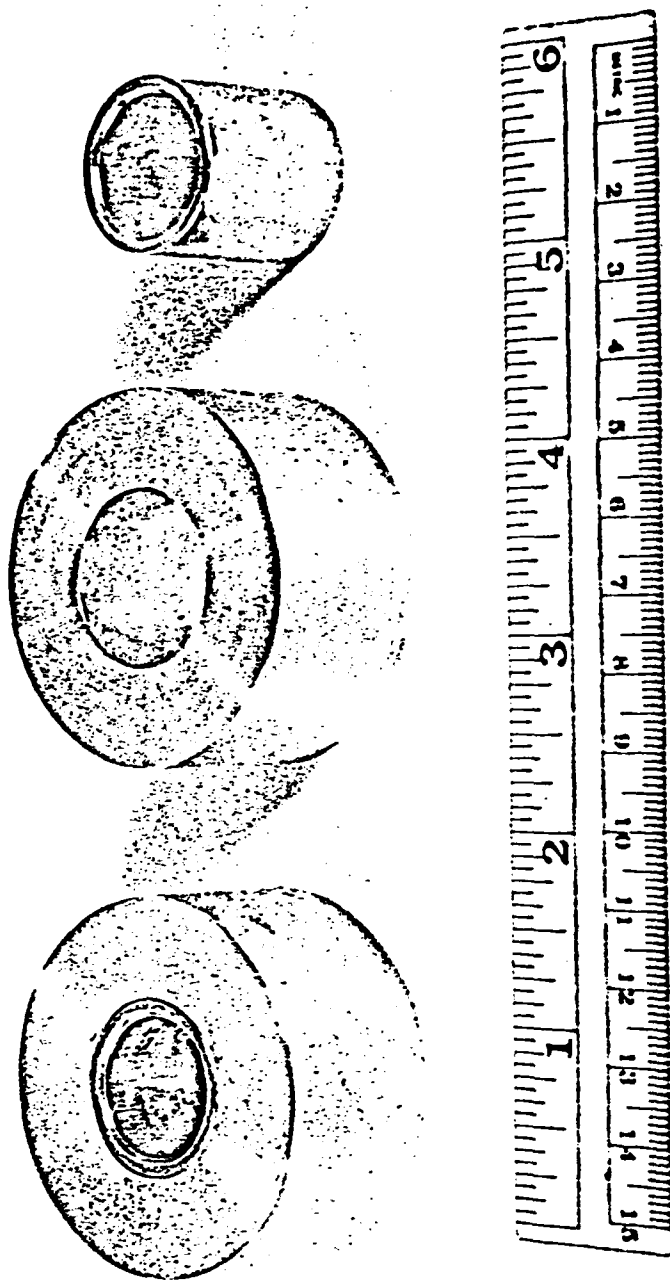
ALUMINUM TEST SPECIMEN AND BUSHING BEFORE AND AFTER ASSEMBLY
